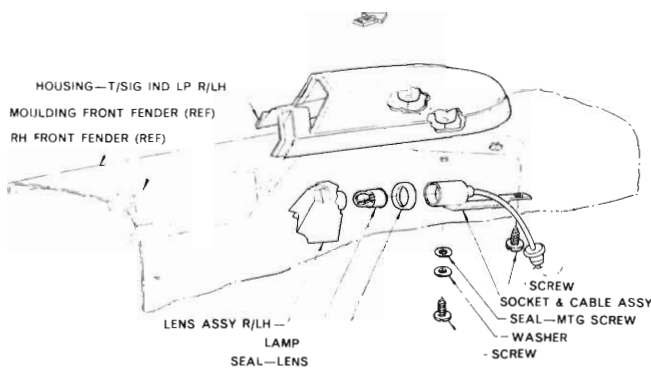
Chrysler turn signal indicator lamp (disassembled view)
